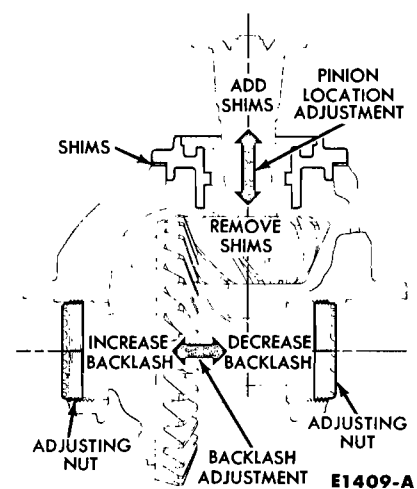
Pinion and Ring Gear Tooth Contact Adjustment—Removable Carrier Type Axles
